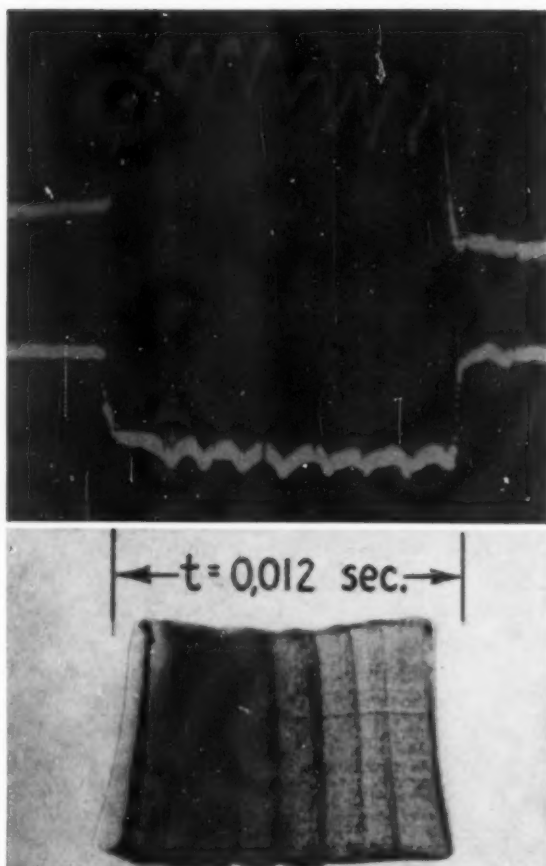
Changes in cutting force and cutting temperature when forming a segmented chip. Workpiece material, SAE 1010 steel; carbide tool cutting speed, 380 fpm; depth of cut, 0.120 inch; feed per tooth, 0.004 inch. In the oscillogram the tangential cutting force (upper trace) is 135 to 175 lb and the cutting temperature (lower trace) is 1166 to 1418 F.
